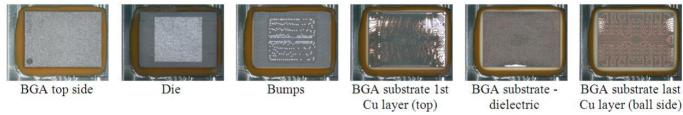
Progressive planar cross-section of an underfilled BGA assembly with the high precision micro-polishing machine
